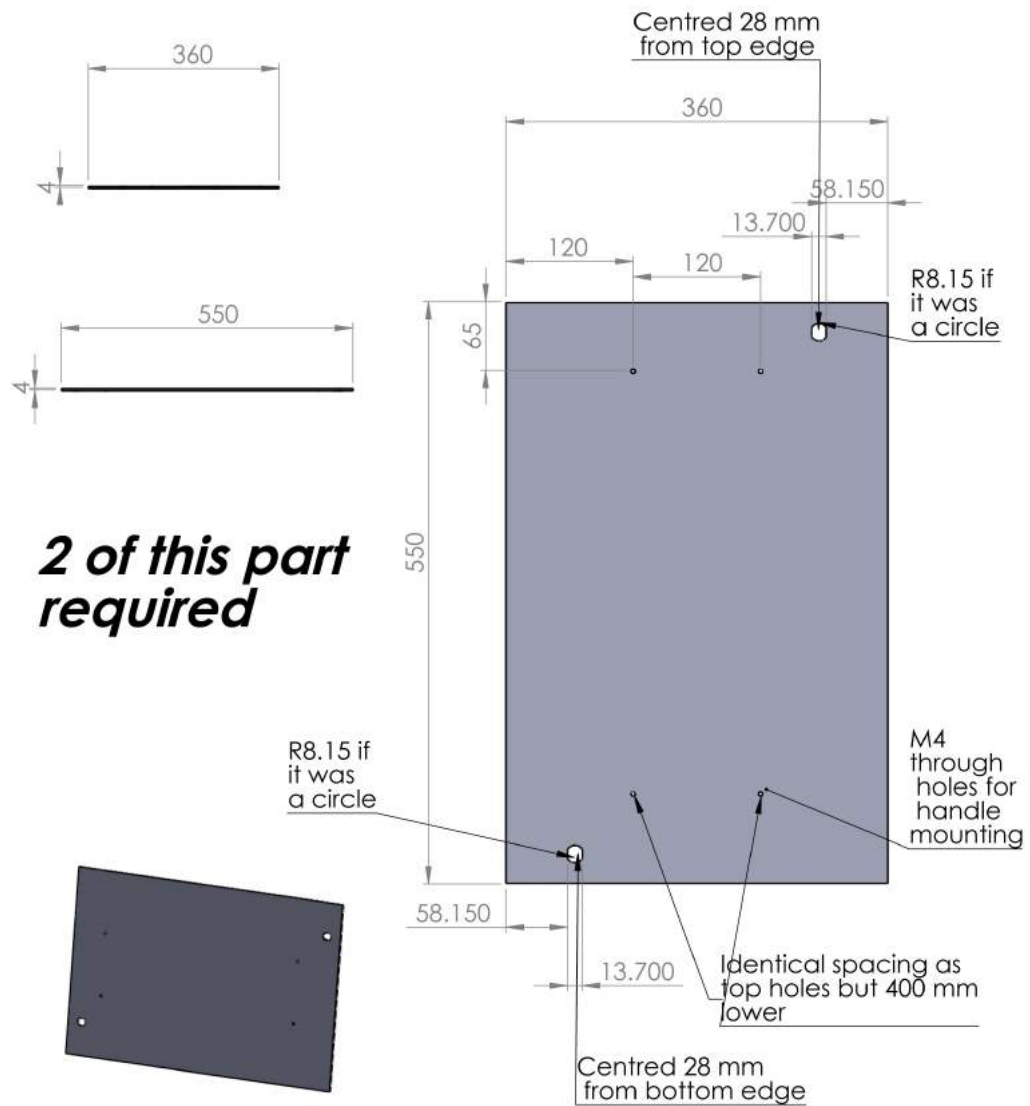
The smaller a-type access panels which enable access to the inside of the Faraday cage via Panels 1 and 3. The through holes for M4 screws are for a set of aluminium handles purchased from RS Components which enable the panel to be held when being removed from the window. The large holes are machined to fit a set of compression locks, also from RS Components, which hold the access panels in place by grabbing the inner frame of the main panel.
